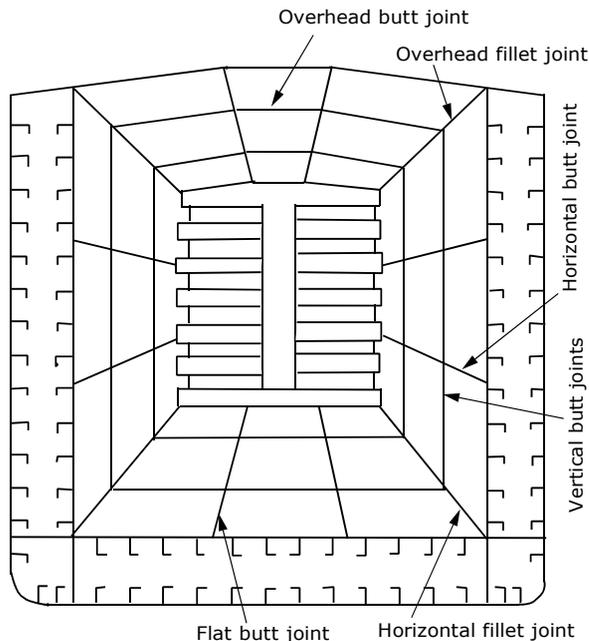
A cross sectional view of a cargo tank and a variety of welding joints in all positions.
